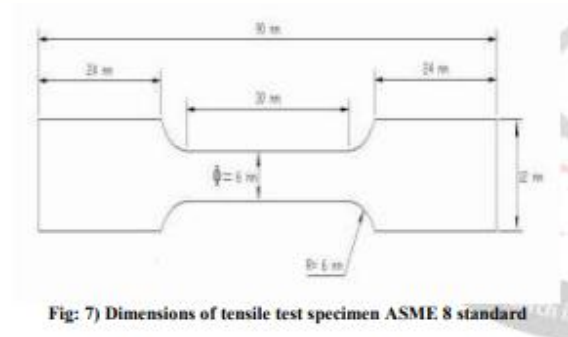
Dimensions of tensile test specimen ASME 8 standard
